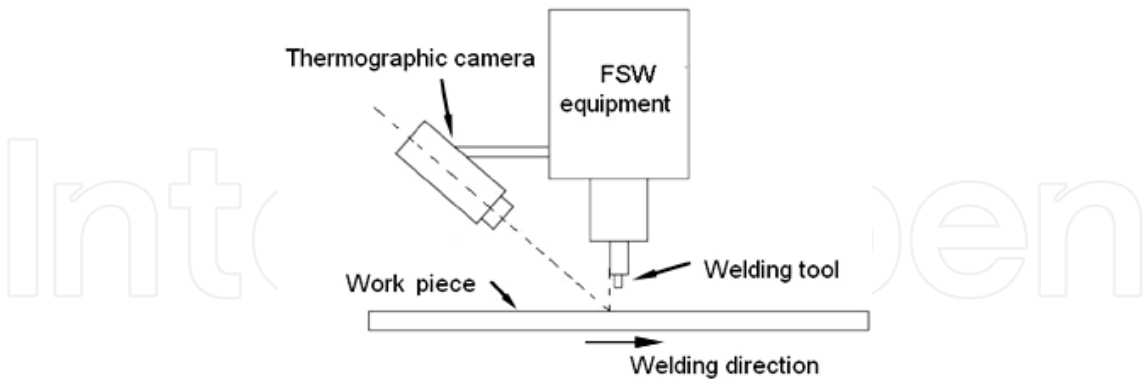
Scheme of positioning for thermographic camera regarding to FSW machine
